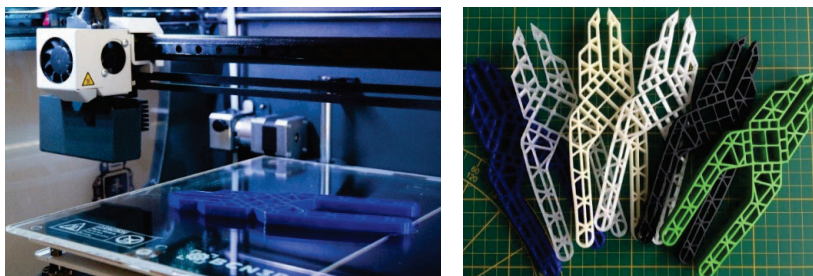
Manufacturing the prototypes with a 3D FFF printer using different materials
